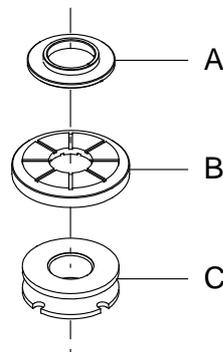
Stop ring (rotating and stationary parts) and split cone
